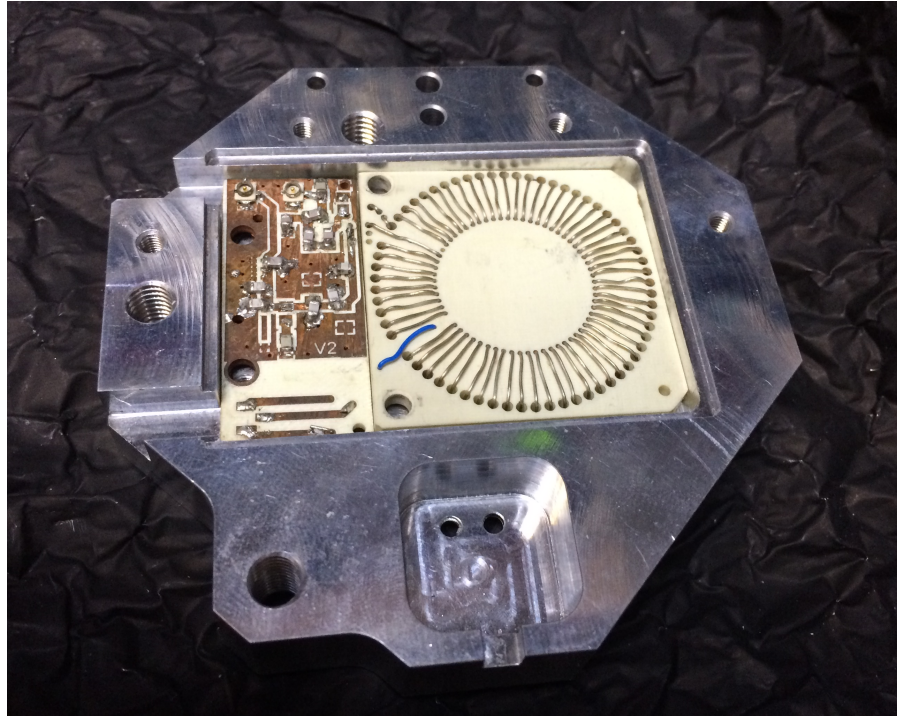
Wire coil wound through a PCB core housed inside the base plate. The smaller PCB on the left allows mounting of the capacitors for impedance matching.
